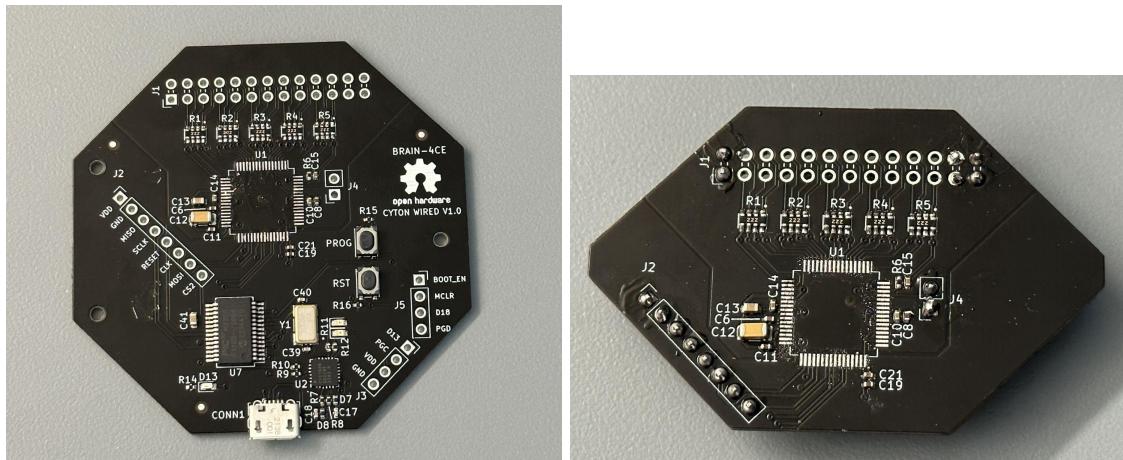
Partially assembled Cyton Wired and Daisy PCBs
